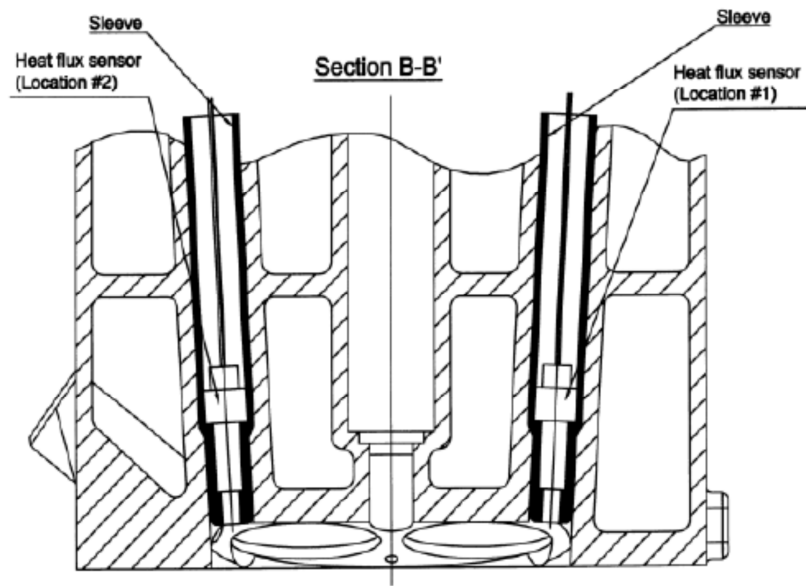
Schematic showing the location of high-speed heat flux probes in the HCCI fuels engine cylinder head
